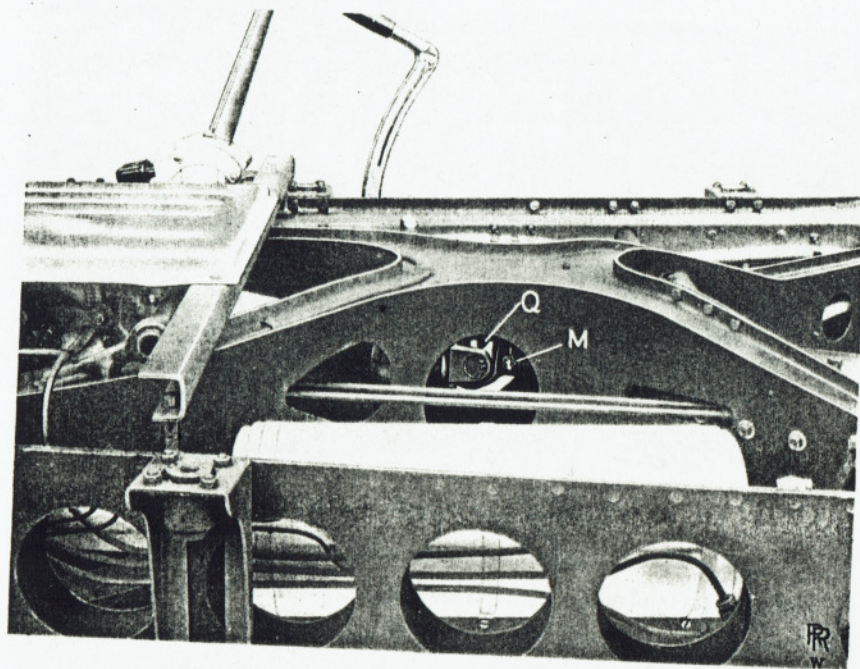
SLIDING JOINT OF PROPELLER SHAFT.
